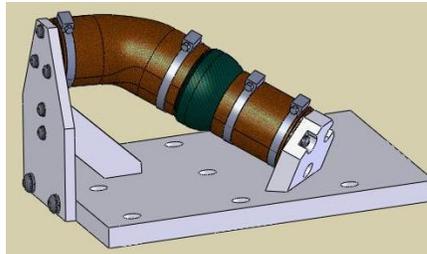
Vibration test fixture for a check valve designed with identical aircraft physical interfaces
